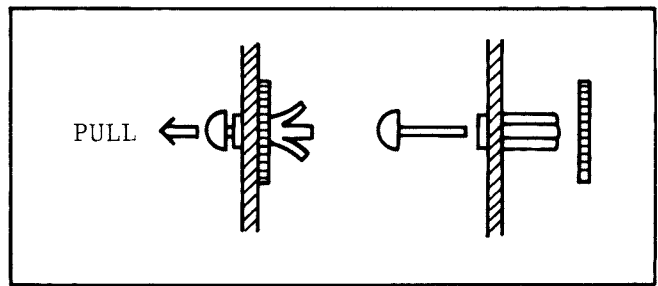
REMOVAL OF PLASTIC RIVET
